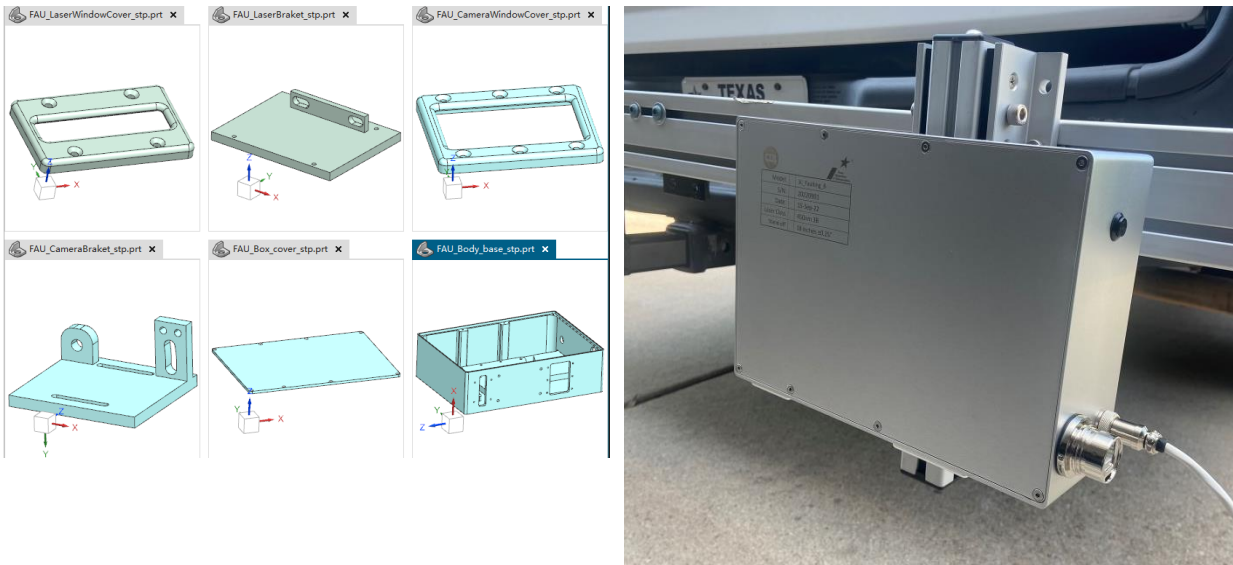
(left) CAD drawings of the designed enclosure; (right) final enclosure for the 3-Line
